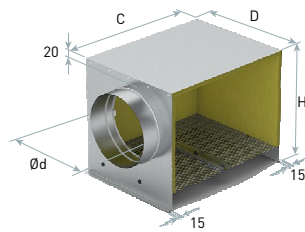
Dimensions of the rectangular box with a side connection pipe.
